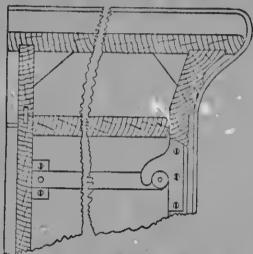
Ealarged Section through Upper Part of Sectional Bookcase.
